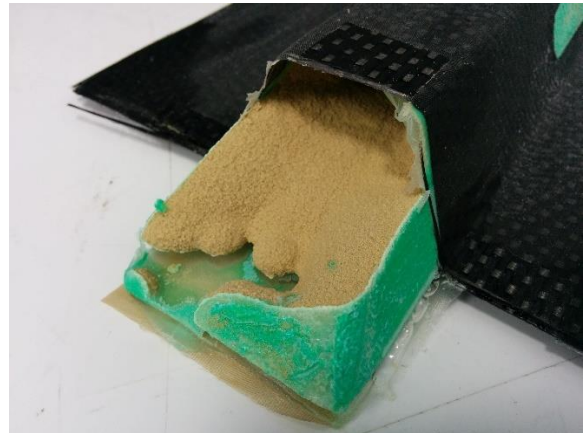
3D printed ceramic core made using binder jetting process.
